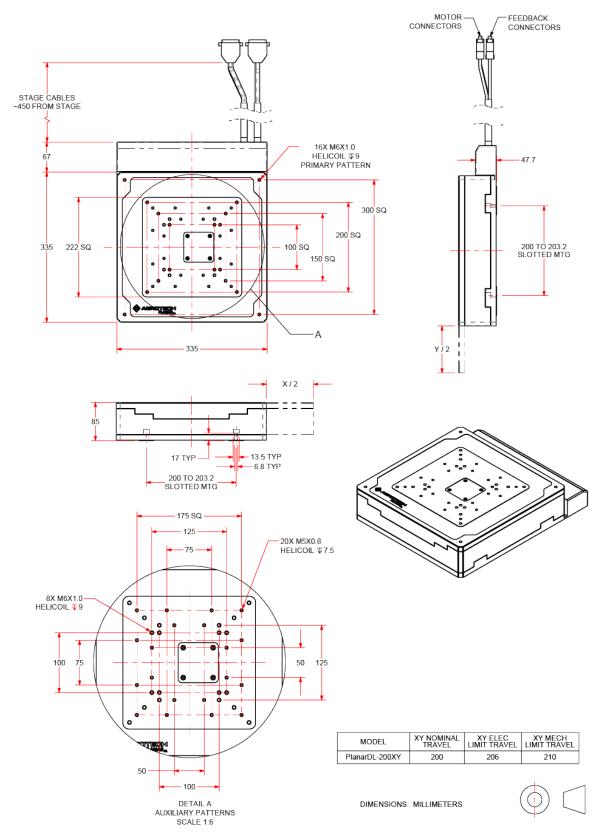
PlanarDL-200XY Dimensions without Cable Management
